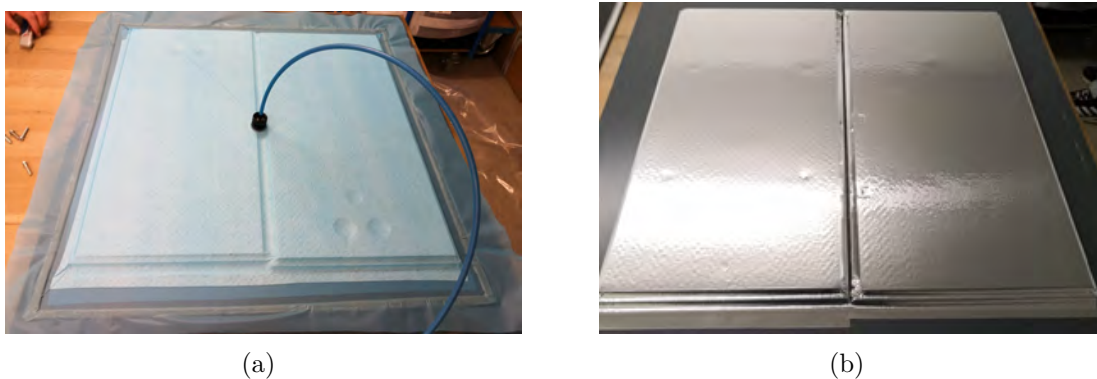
Vacuum bagging of aluminised polyimide foils to sandwich panels.
